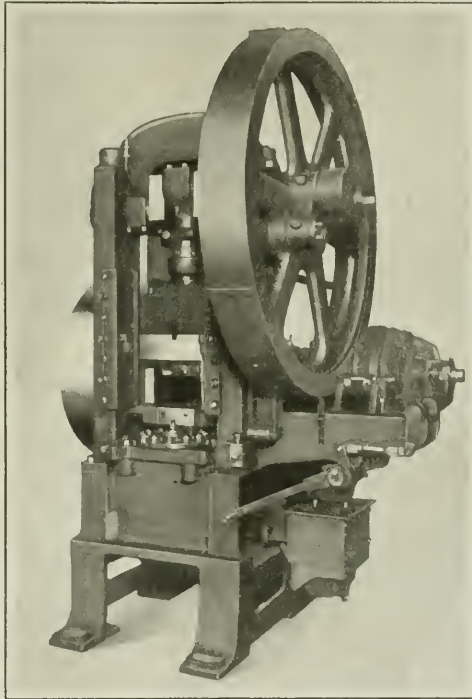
Power Press with Dial Feed equipped for Broaching Operations on Bronze Bushings
